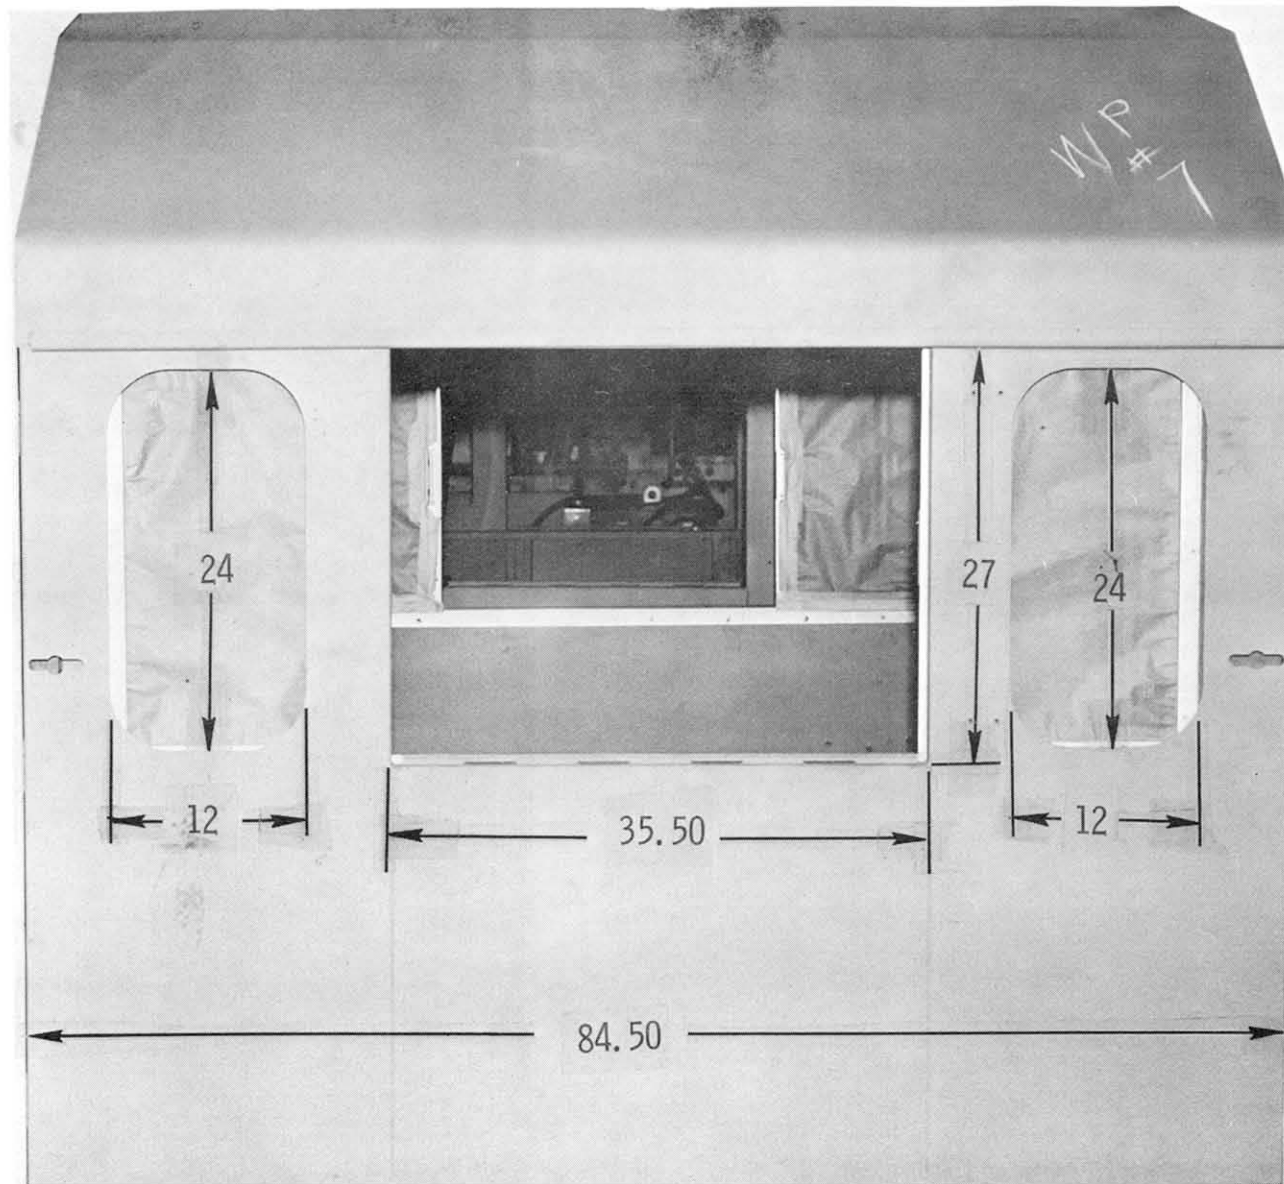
Outside View Of Basic GE Cab (partially assembled)
